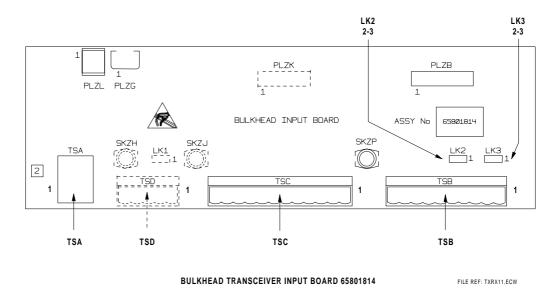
Bulkhead Transceiver - Input Board Details
